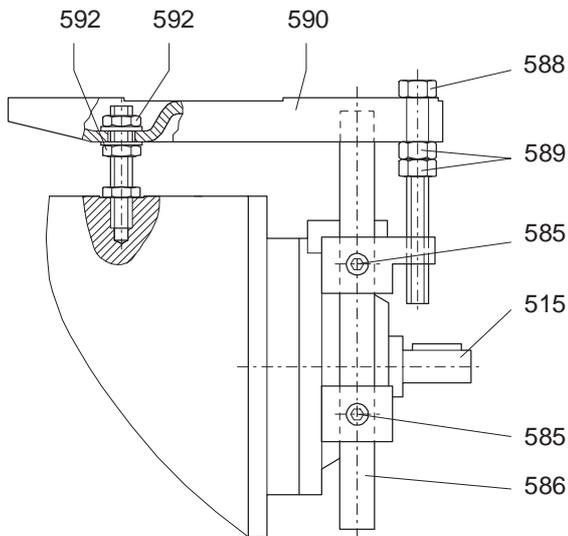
Mounting motor bedplate IEC motors from size 225
